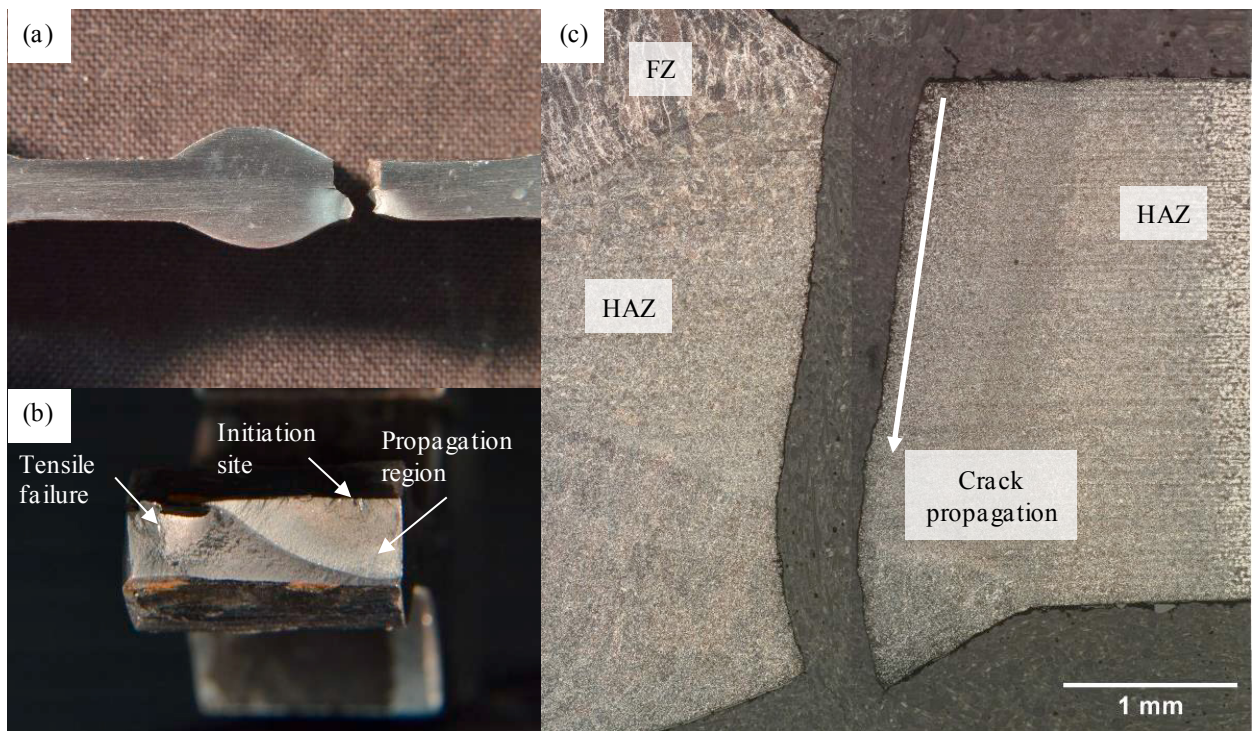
Fractography of failed specimens: (a) side view showing characteristic failure from weld toe ($\sigma_a = 320$ MPa, $N_f = 3.04 \times 10^4$); (b) fracture surface ($\sigma_a = 150$ MPa, $N_f = 1.05 \times 10^7$); (c) cross-section transverse to crack propagation direction [x50, etched].
